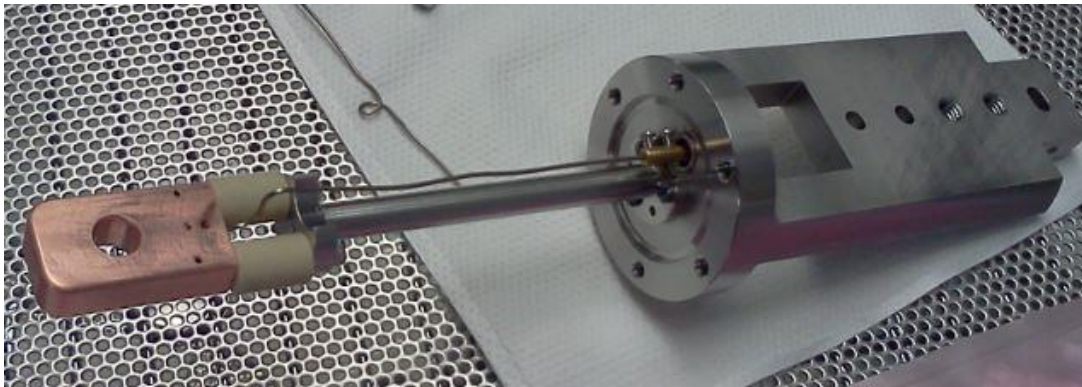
Collimator assembled in the cleanroom, less the edge-welded bellows.
